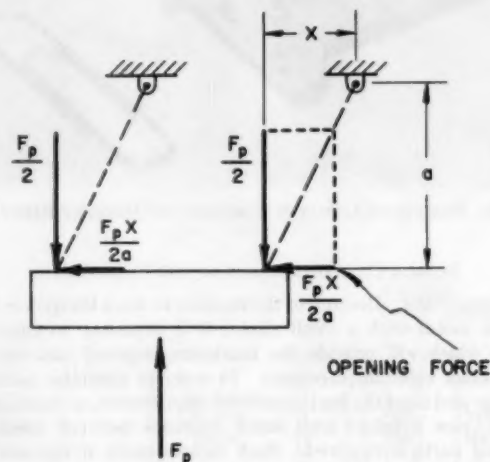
SKETCH OF VALVE PLATE SHOWING HOW AN OPENING FORCE RESULTS FROM PRESSURE FORCE ACTING ON BOTTOM OF VALVE PLATE
